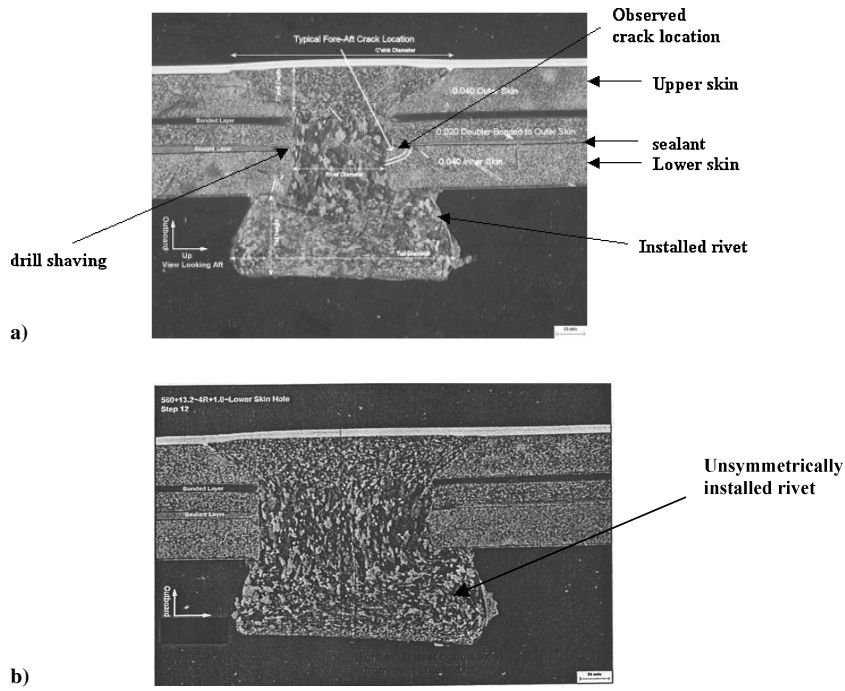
Microscopy of riveted sections in lap joint.^{3,4}
